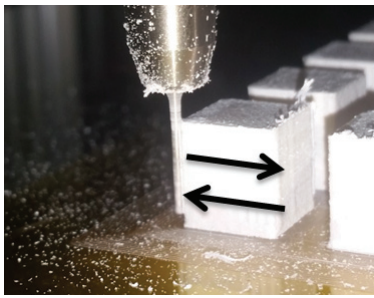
Test of cutting tool for post-processing in Hybrid-FDM
